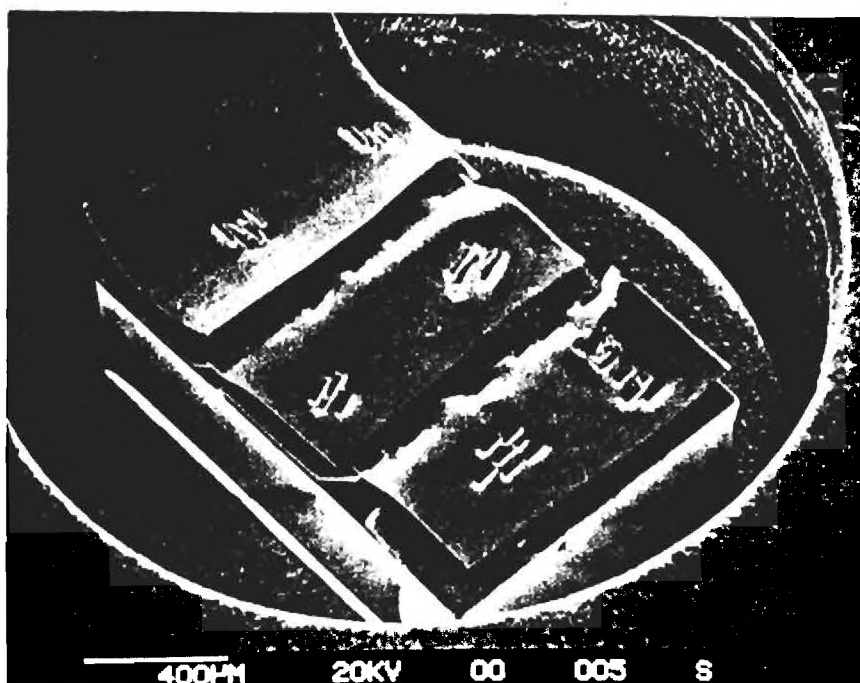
Three-Chip Assembly VSX9251AM-0. Nominal Geometry of Three-Chip Device.
